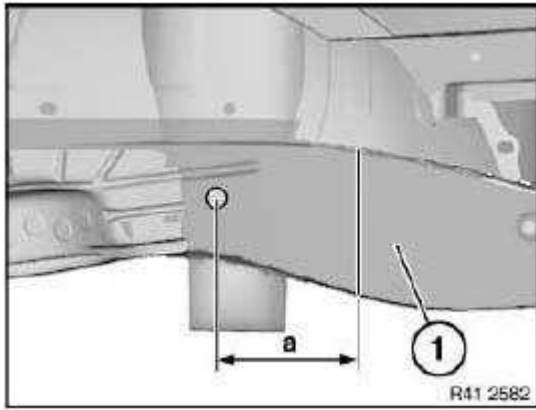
Cut Rear Axle Carrier Lower Section Measurement
